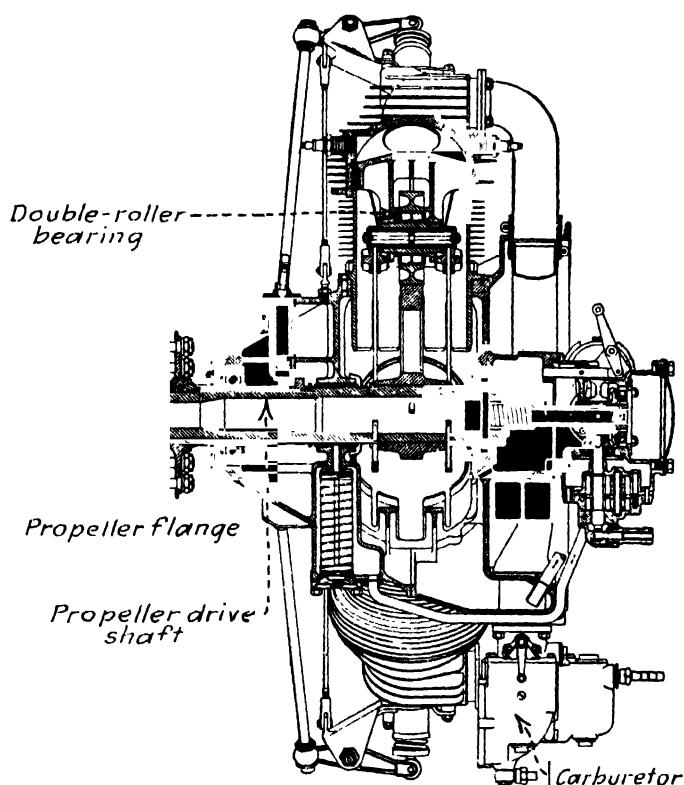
Side Sectional Elevation Drawing of Caminez Engine Showing Simplicity of Valve Gear and Piston Arrangement.
